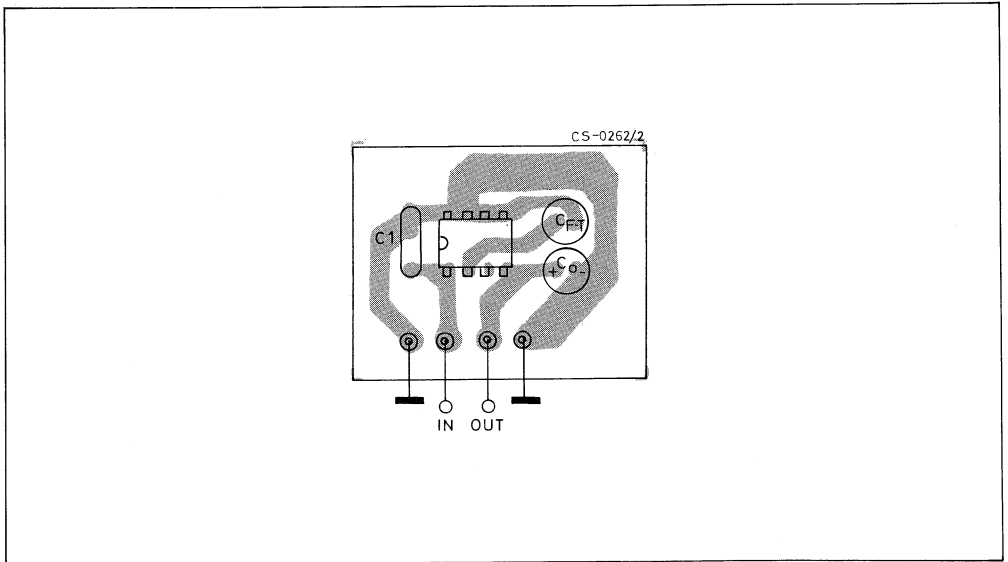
P.C. board and component layout of fig. 1 (1 : 1 scale)
